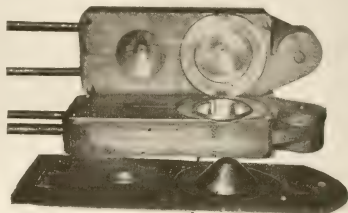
TANK BULB HINGED SHAPING MOLDS AND CONE PLATE SHAPER.
